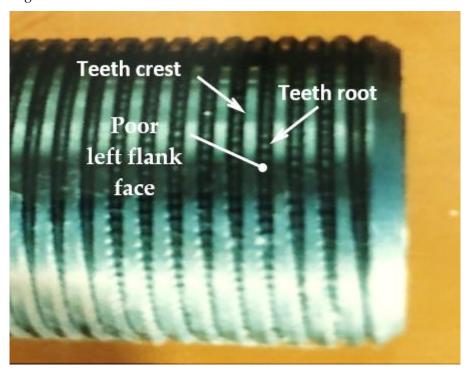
Poor surface of the right flank of the screw produced by flank infeed.
